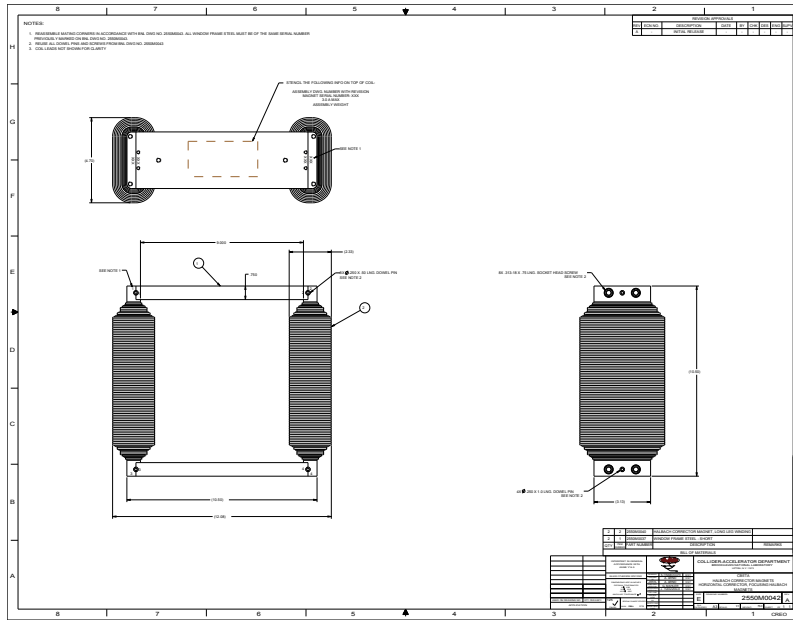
A mechanical drawing of the corrector showing the dimensions in inches of the iron core of the window frame magnet.
